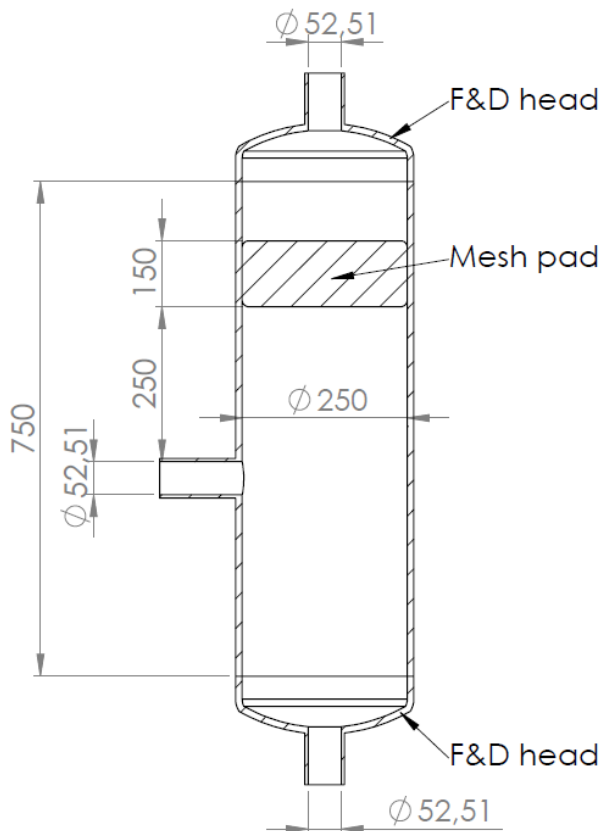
Illustration of initial design of Scrubber with two flanged and dished (F&D) pressure vessel heads and location of mesh pad indicated.
